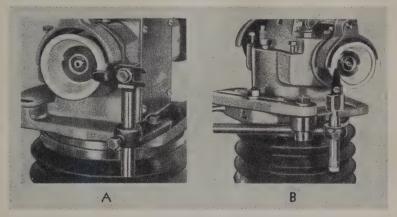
A. Plain tooth rest. B. Universal tooth rest.
